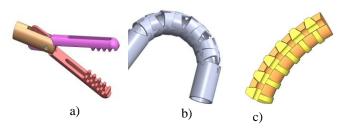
Three areas of the cable ring grasper which are difficult to clean due to tight clearances between components. (a) and (c) created from models provided by Deam Corporation.
